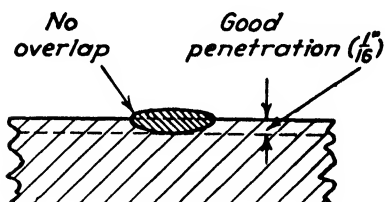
Weld with a short arc. This protects the metal being deposited, and gives good penetration with little or no overlap.
